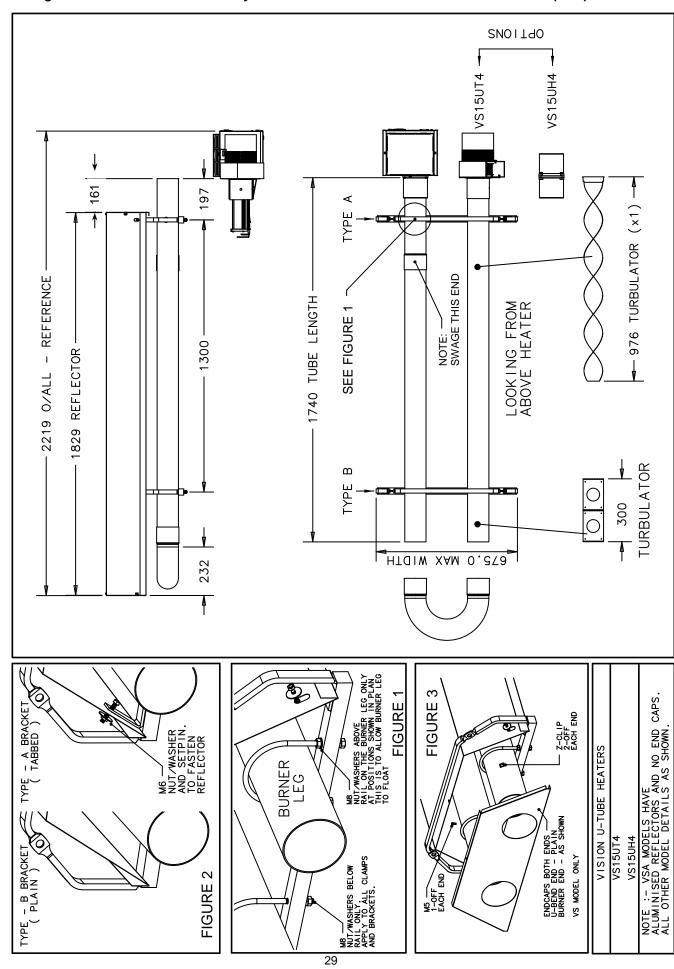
Vision Heater Assembly: Models VS/VSA U tube 15kW.
